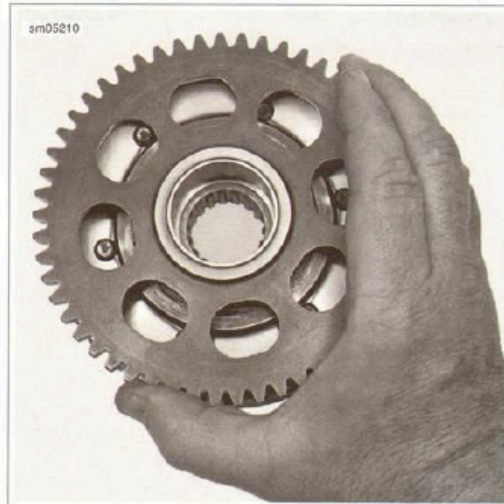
Rotate Starter Gear to Fit Sprag Clutch
